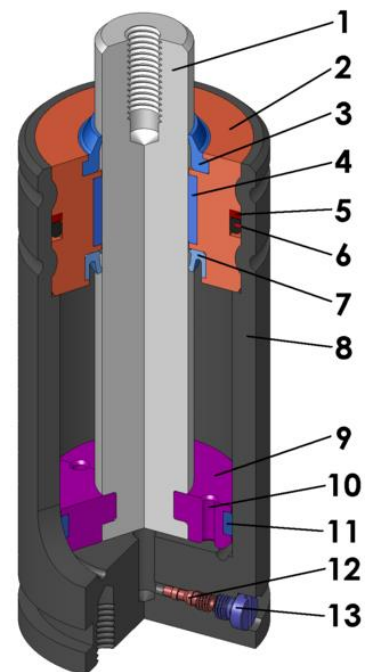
3D-view of a gas spring with sectional view (Silberwolf, 2007). 1) Piston rod; 2) Head cap; 3) Piston rod wiper; 4) Piston rod guide bushing; 5) Retaining ring; 6) O-ring; 7) Piston rod seal; 8) Cylinder; 9) Piston; 10) Flow-restriction orifice; 11) Piston guide bushing; 12) Valve; 13) Valve-sealing screw
